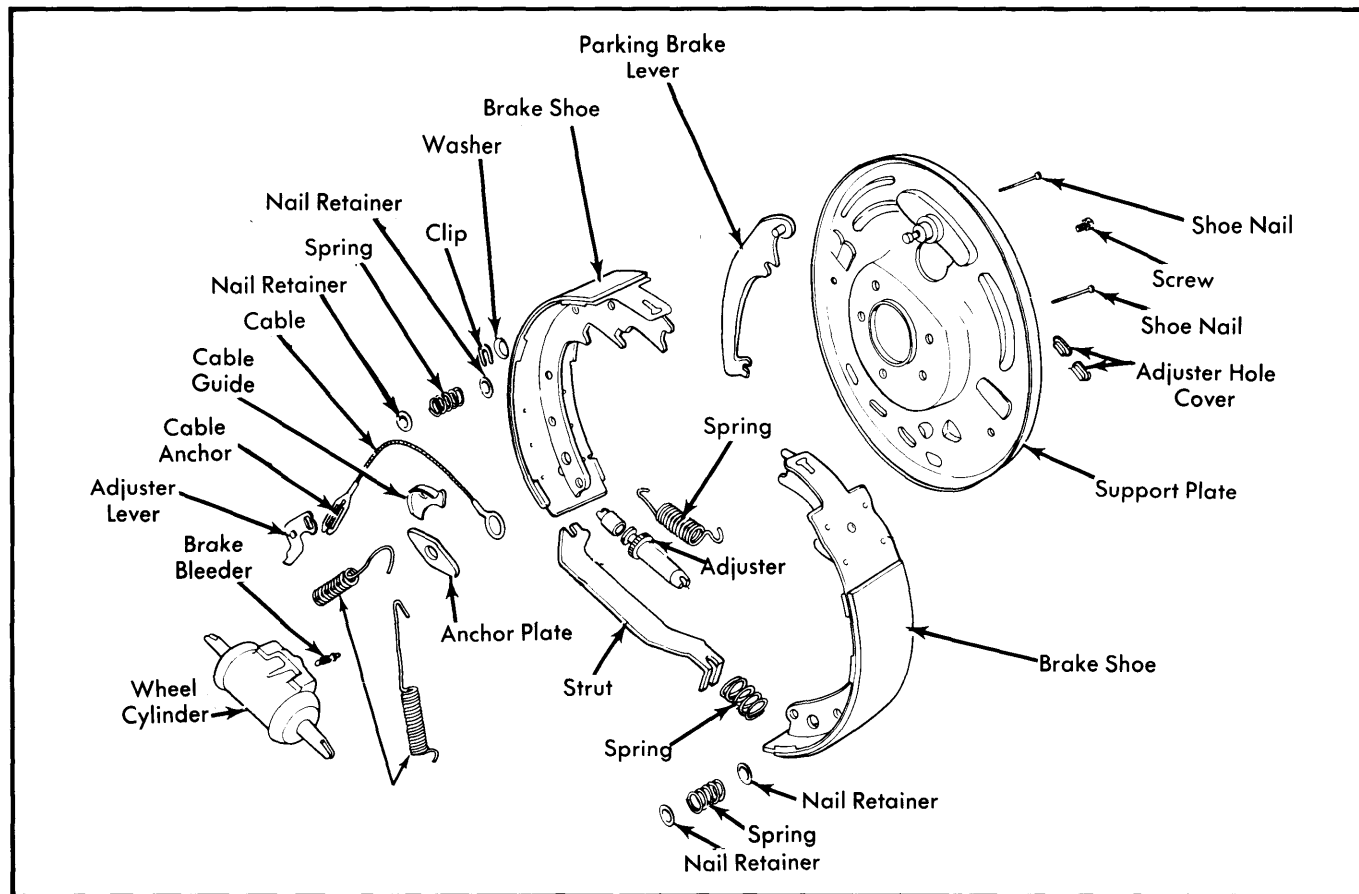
Exploded View of Chrysler Type Brake Assembly
